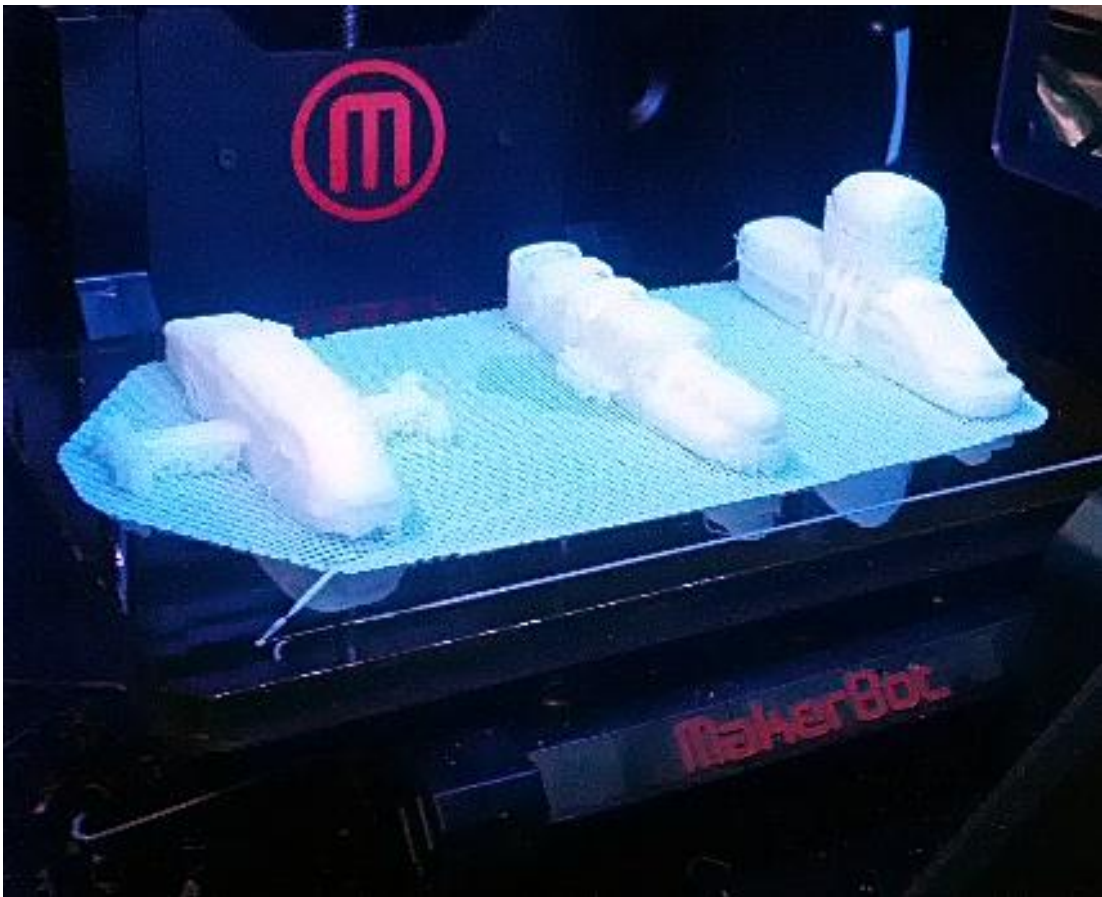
3D printed Prototype Parts with Raft and Support Material
